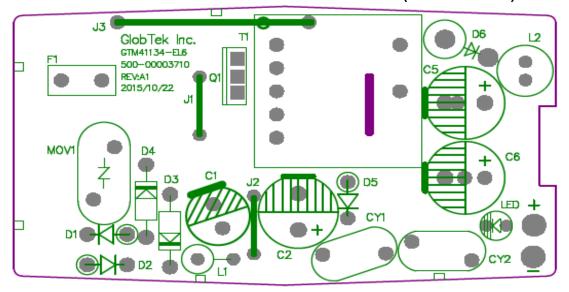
PCB LAYOUT for model GT-41134-0606-W2-TAB (Third structure)
